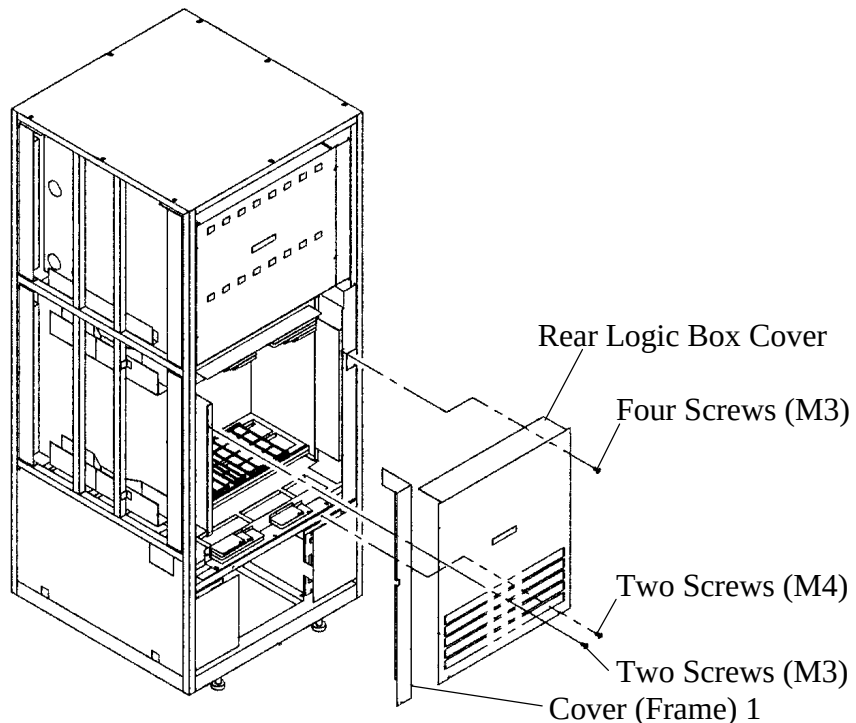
Removal of Covers (DKC rear side)
